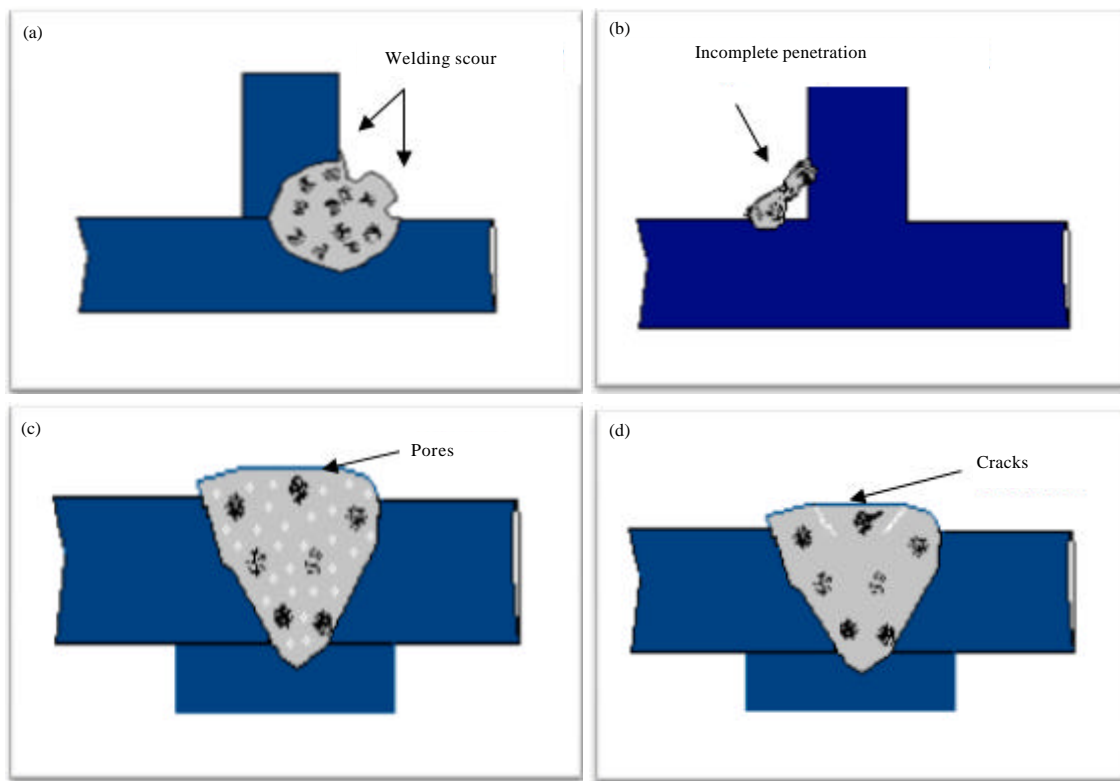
(a-d): Characterization of welding defects, (a) Scour in a melted groove into the base metal at the bottom side of the weld or in the weld root can be touched with the thumbnail, the scour at butt joints is very easy to detect, (b) Happens by conditions in the root of the union in which the weld metal does not exceed the thickness of the joint. Without penetrating areas and without merging is a discontinuity described as incomplete penetration at the junction, (c) Pores is a type of discontinuous hole formed within weld by gas trapped during solidification. One common cause of porosity is contamination during welding and (d) Shrinkage in all welding and bonding or any portion of it, as in the heat affected zone can not be accommodated due to shrinkage stress produced by plastic deformation, then stress will develop very strong. This stress can cause cracks
